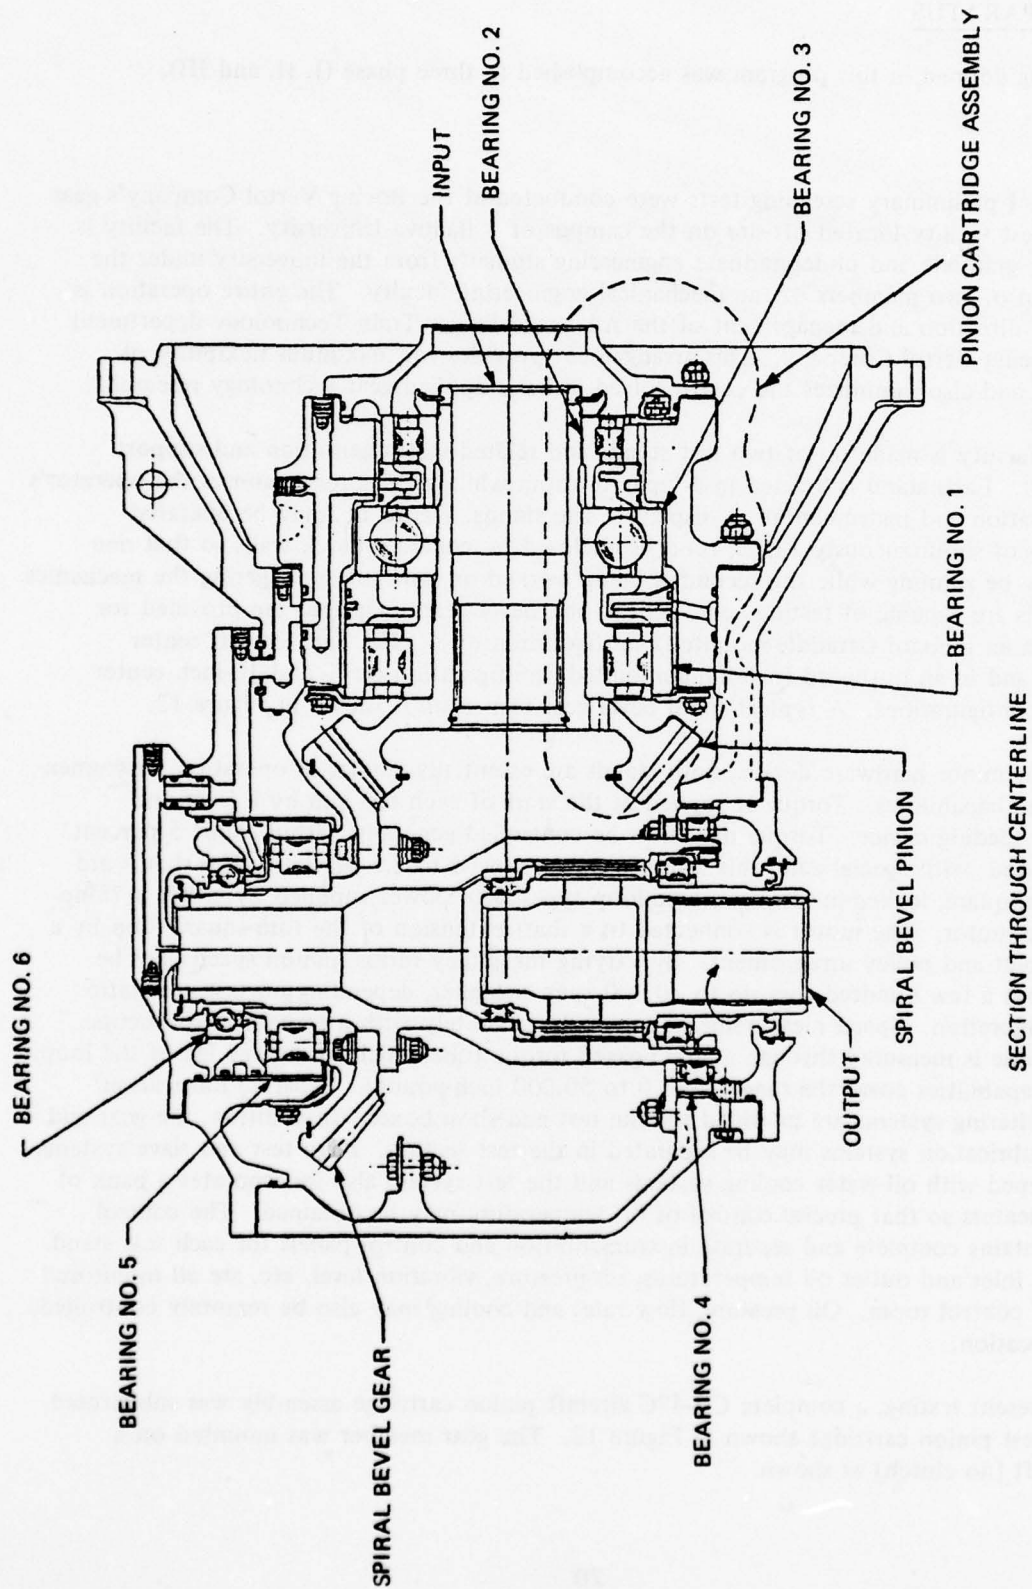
Cross Section of the CH-47 Engine Nose Gearbox.
